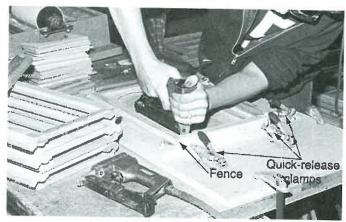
Quick-release clamps are often bolted to a jig. This jig, made of plywood with a fence and clamps, is for assembling picture frames. It is clamped to the workbench with a bar clamp. (*Craft Products*)
